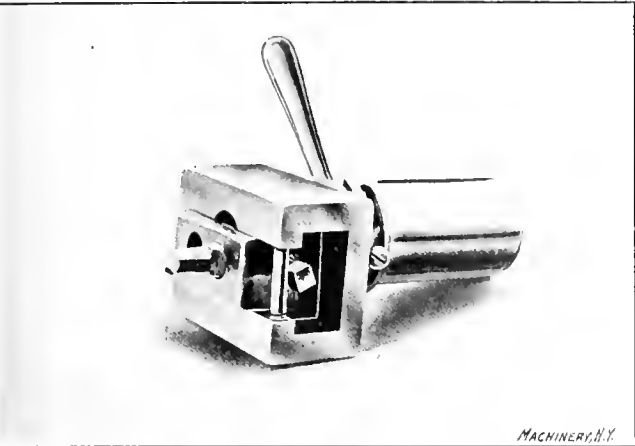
A Convenient Recessing Tool for Screw Machine Work
